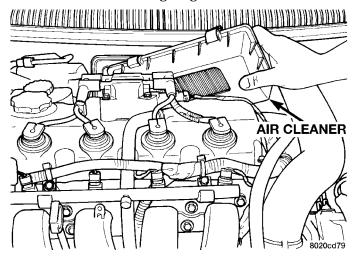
Removal/Installation Air Cleaner Front Housing and Element
